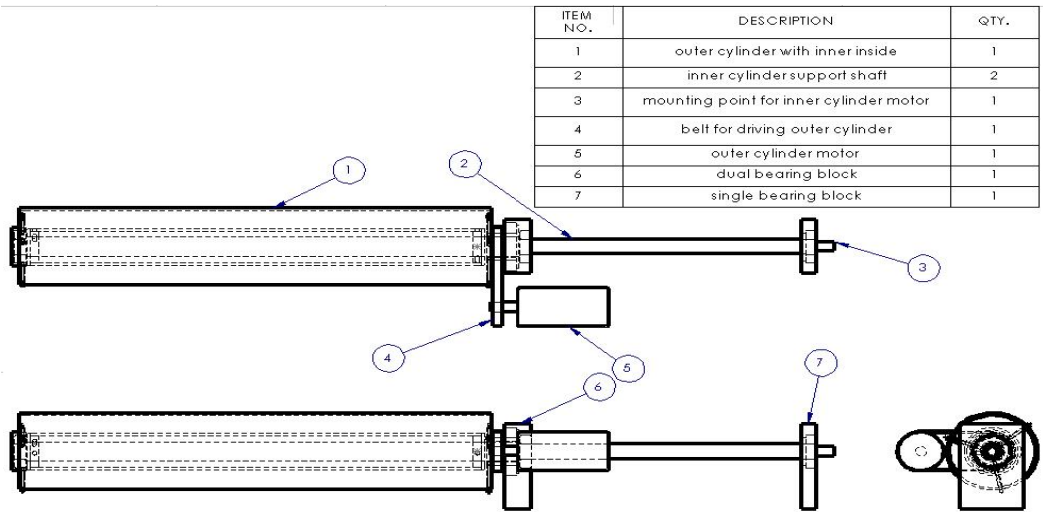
The preliminary design of a concentric rotating cylinder assembly.
